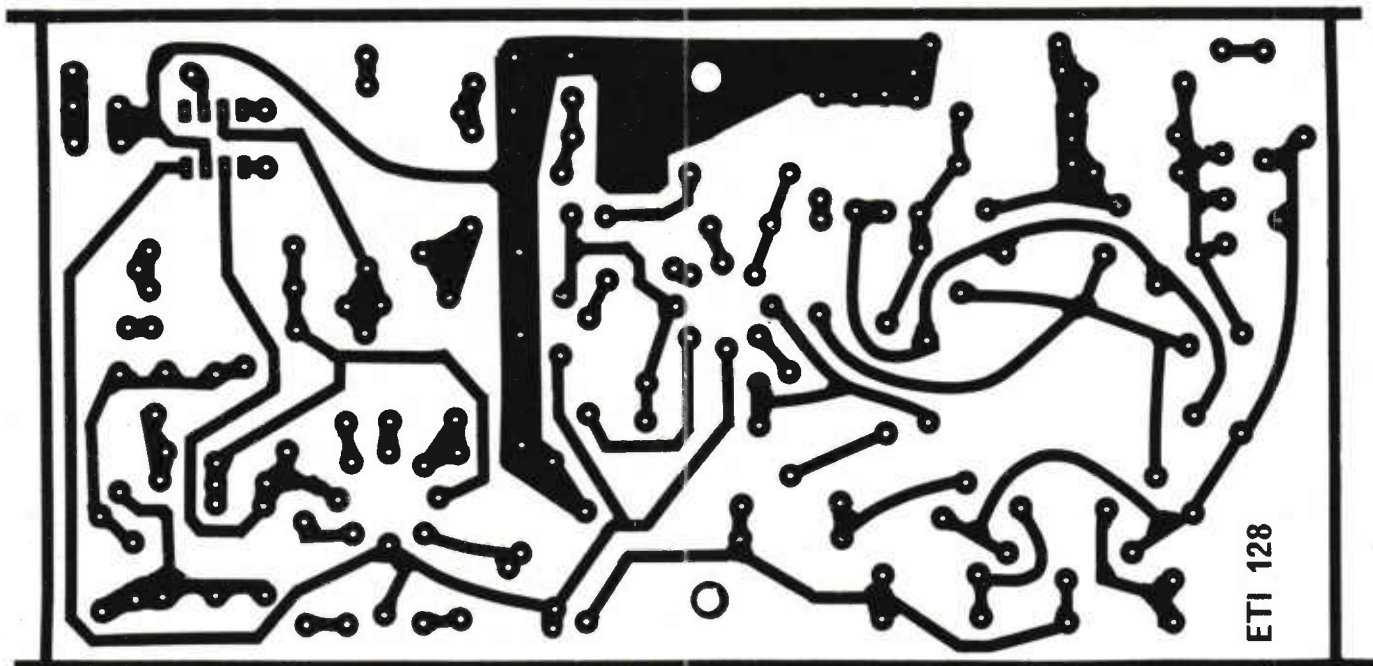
Printed circuit layout. Full size 170 x 87 mm.
